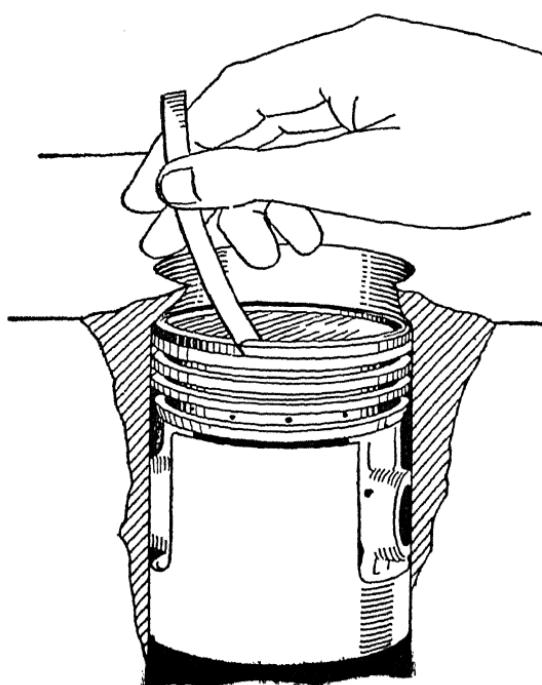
Testing End Clearance of Piston Ring in Cylinder
